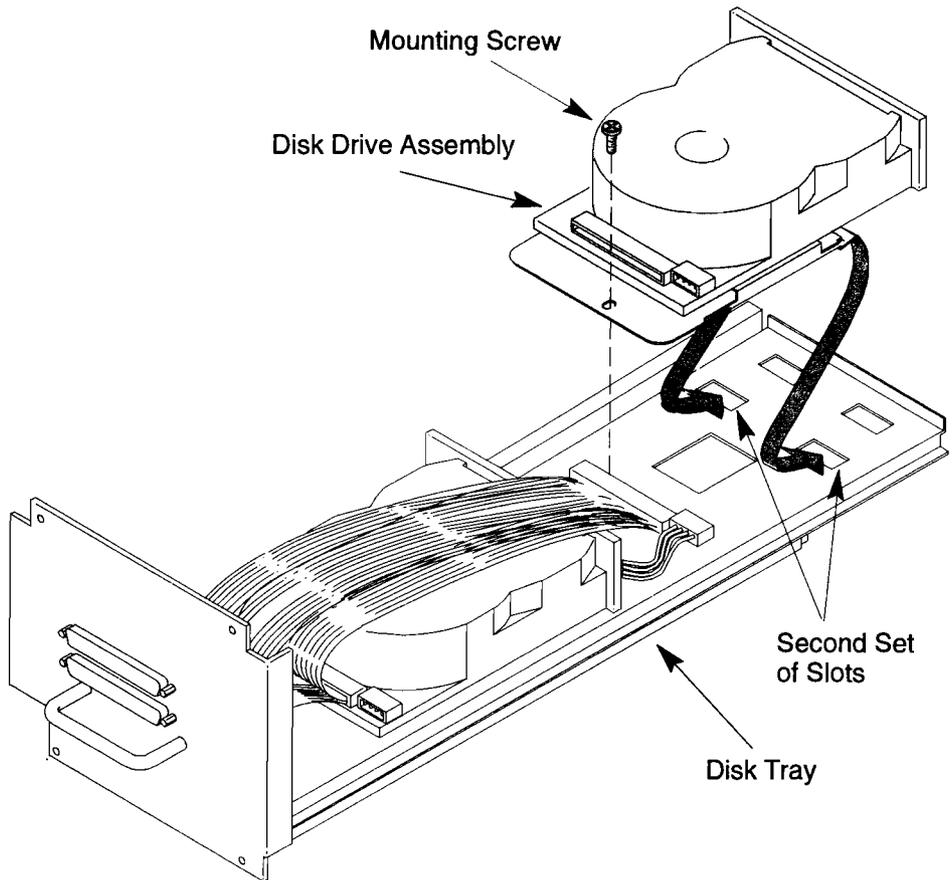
Mounting the Disk Drive Assembly on the Disk Tray
